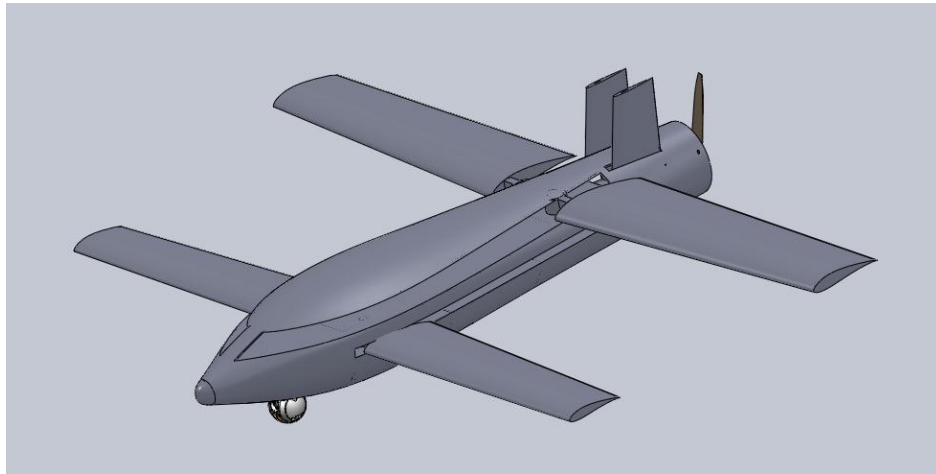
FINAL IMPROVED CONFIGURATION, ISOMETRIC VIEW
